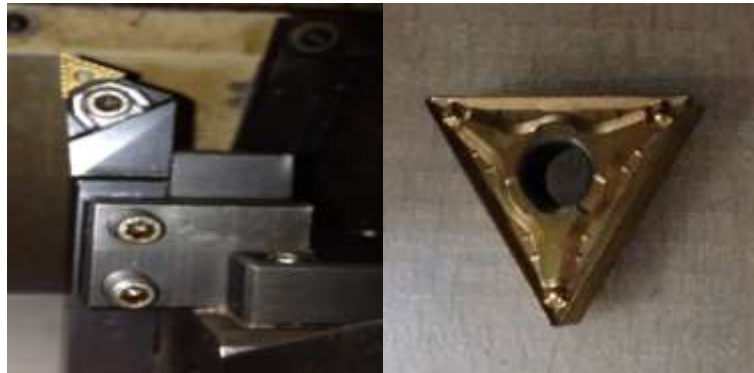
Cutting tool TNMG 2020 coated inserts used for turning operation
